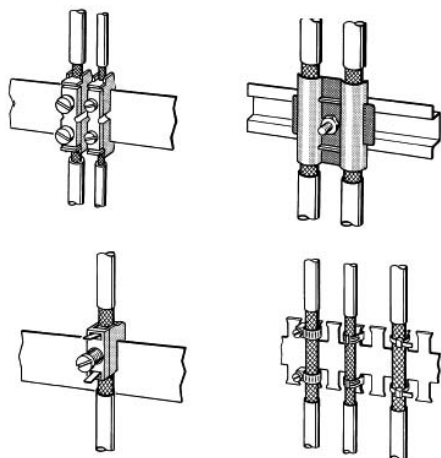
Securing shielded cables with cable clamps and cable retainers (schematic image)
